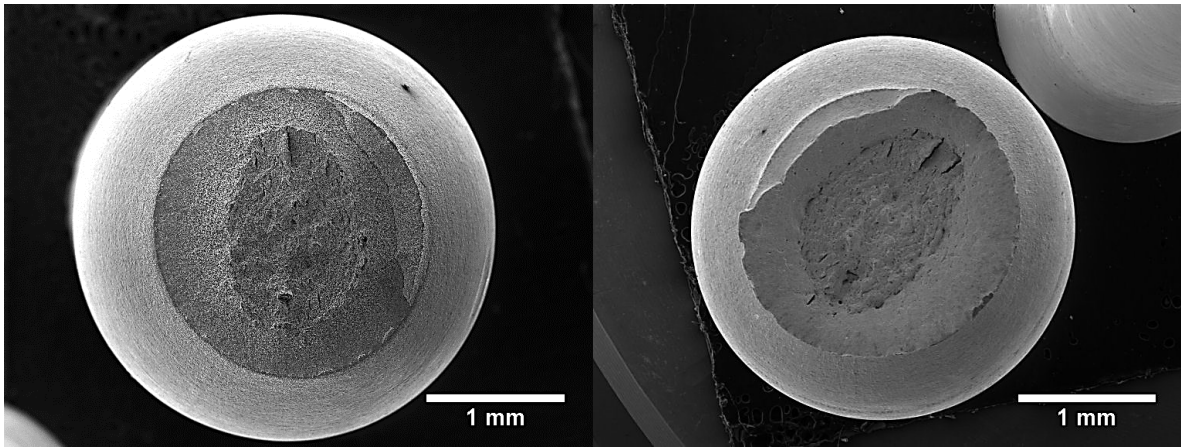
SEM image of the fracture surfaces of MnCr steel showing a typical cup and cone fracture after failure in air.
